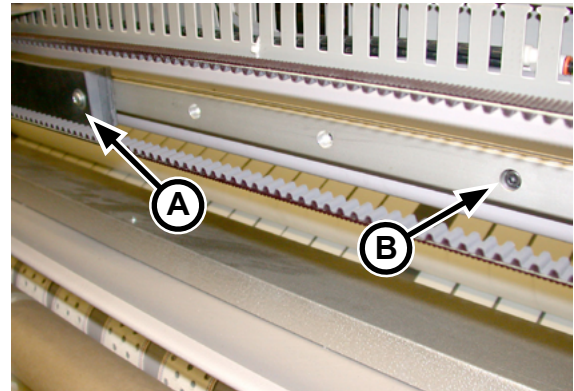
Remove one screw each from the rubber block and the spreader rail.
